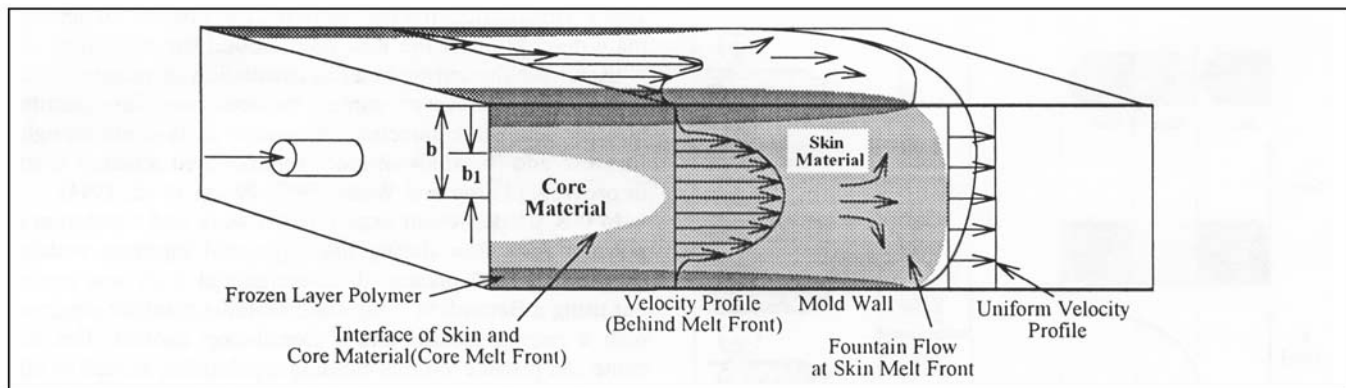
Skin and core melt fronts and skin-core interface in the cross-sectional view.
